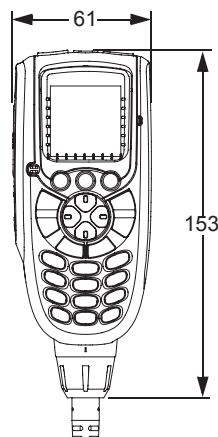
Front View of O3 Control Head with Coiled Cable
